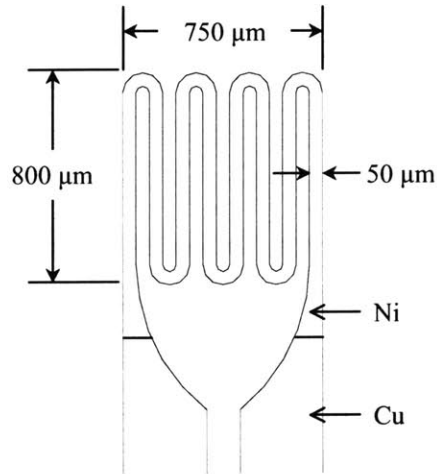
Detailed Schematic of Gauge Sensor Geometry
